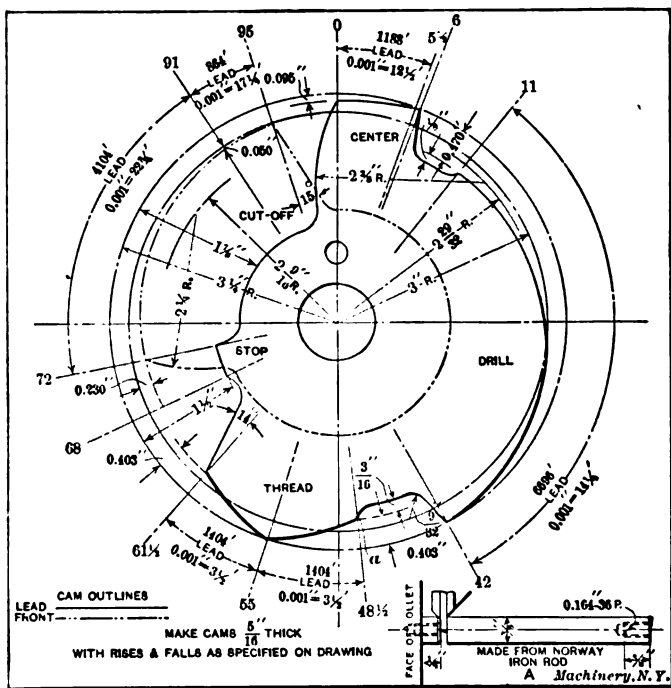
Example of Design of Thread Lobe when using Belt Shifting Attachment
